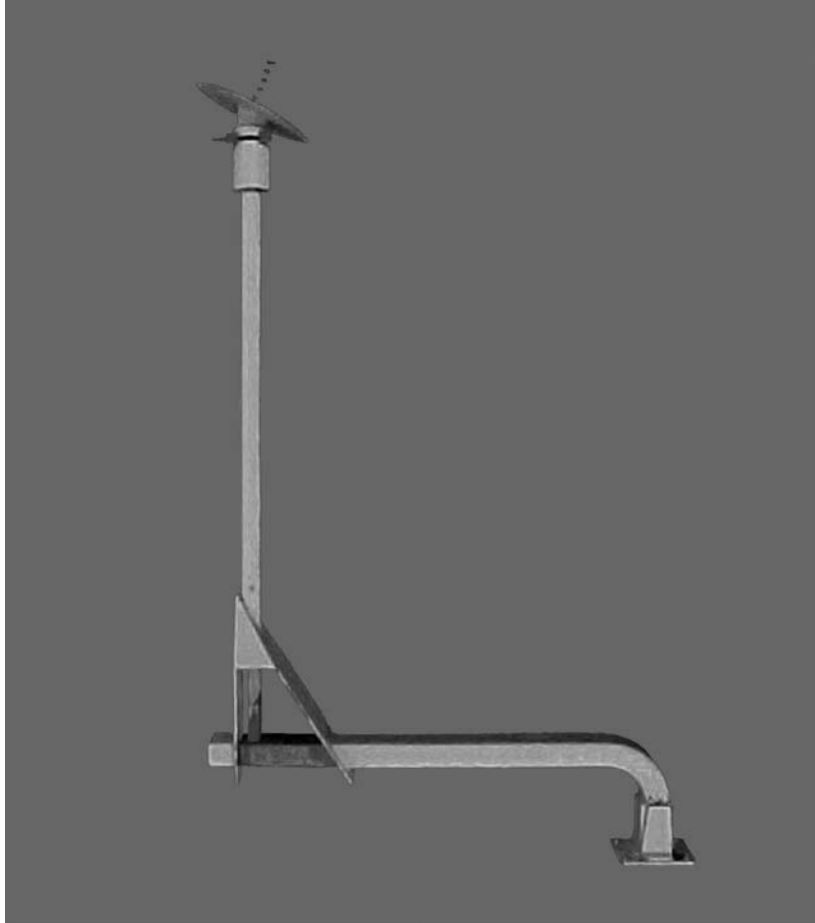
Solar Probe antenna feed assembly prototype.
